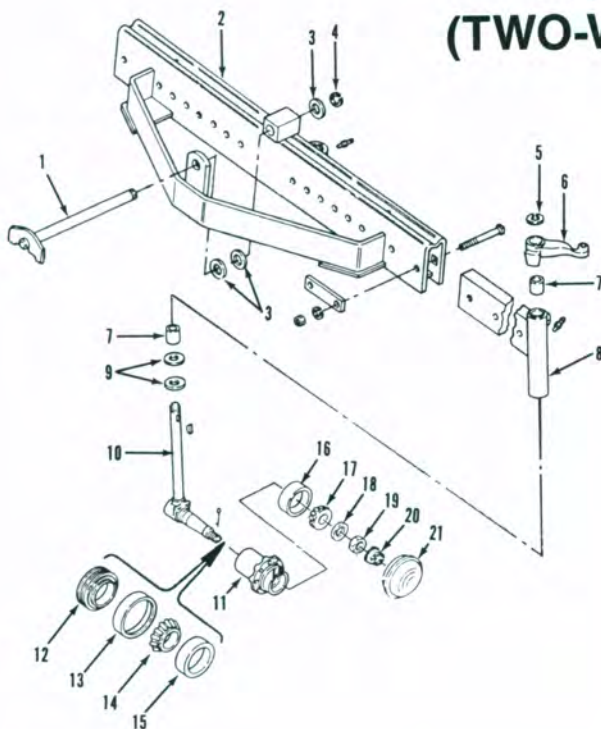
Exploded view of adjustable front axle used on Model 6080. Other models are similar.
